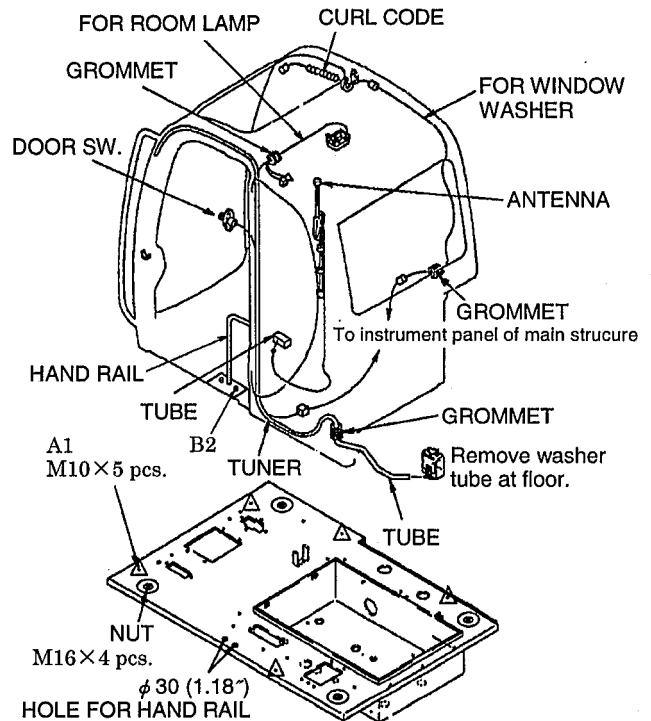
Removing and attaching harness connector and cab mounting bolts
